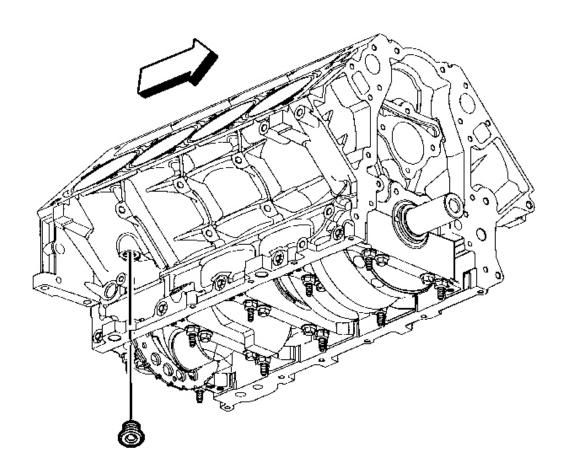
Identifying Plug Location On Underside Of Block Courtesy of GENERAL MOTORS CORP.
